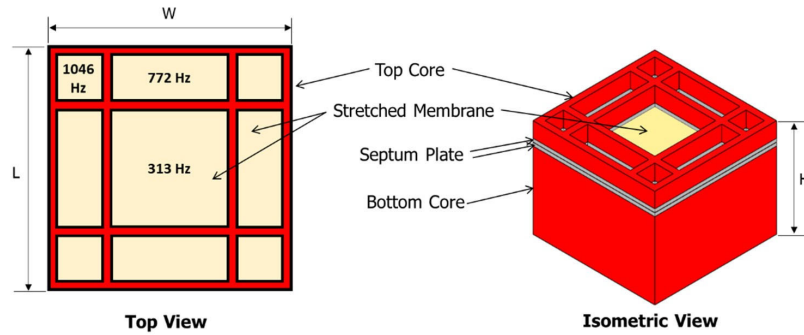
Top view (left) and isometric view (right) of the non-uniform MEL
